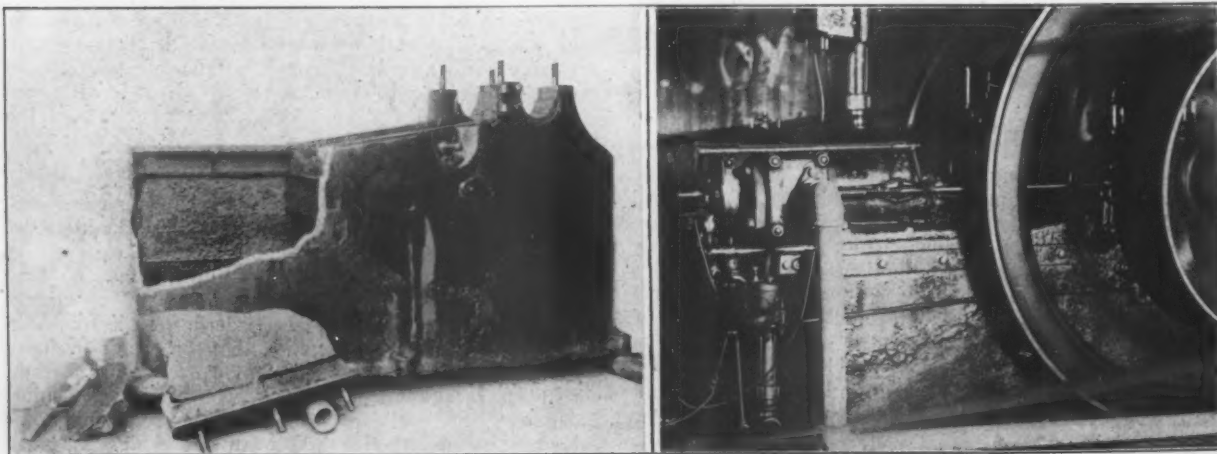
A Gas Engine Before and After Being Repaired by this Machine.
